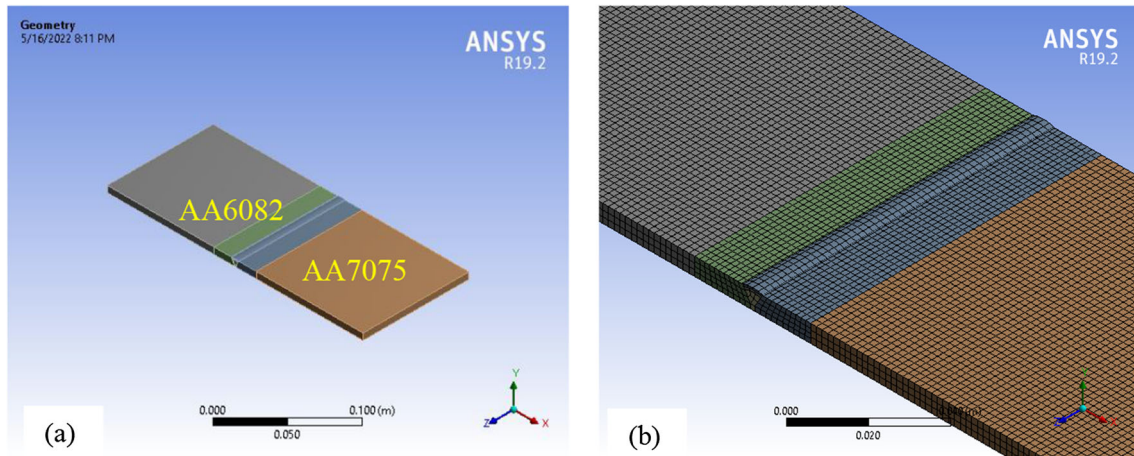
a Welding model of dissimilar weld and b fine meshing of model
